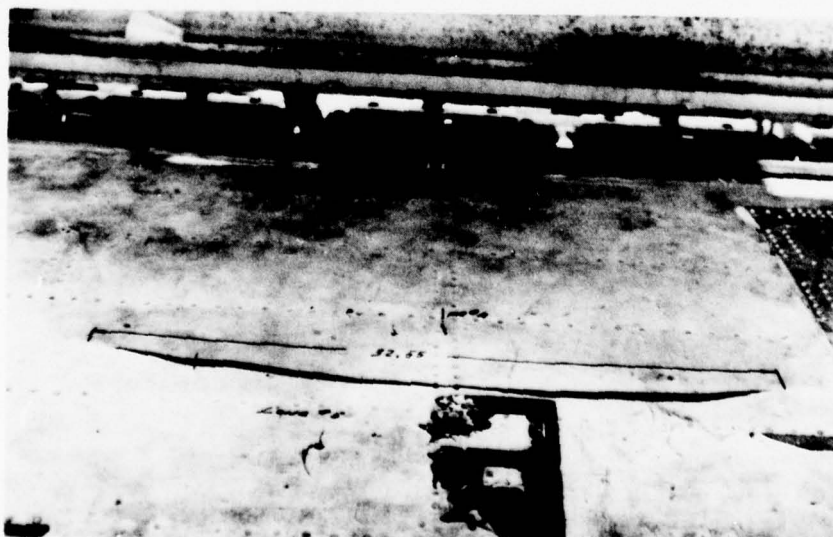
TWO-BAY CRACK AFTER CENTER FRAME FAILURE (CURVED PANEL TEST)
